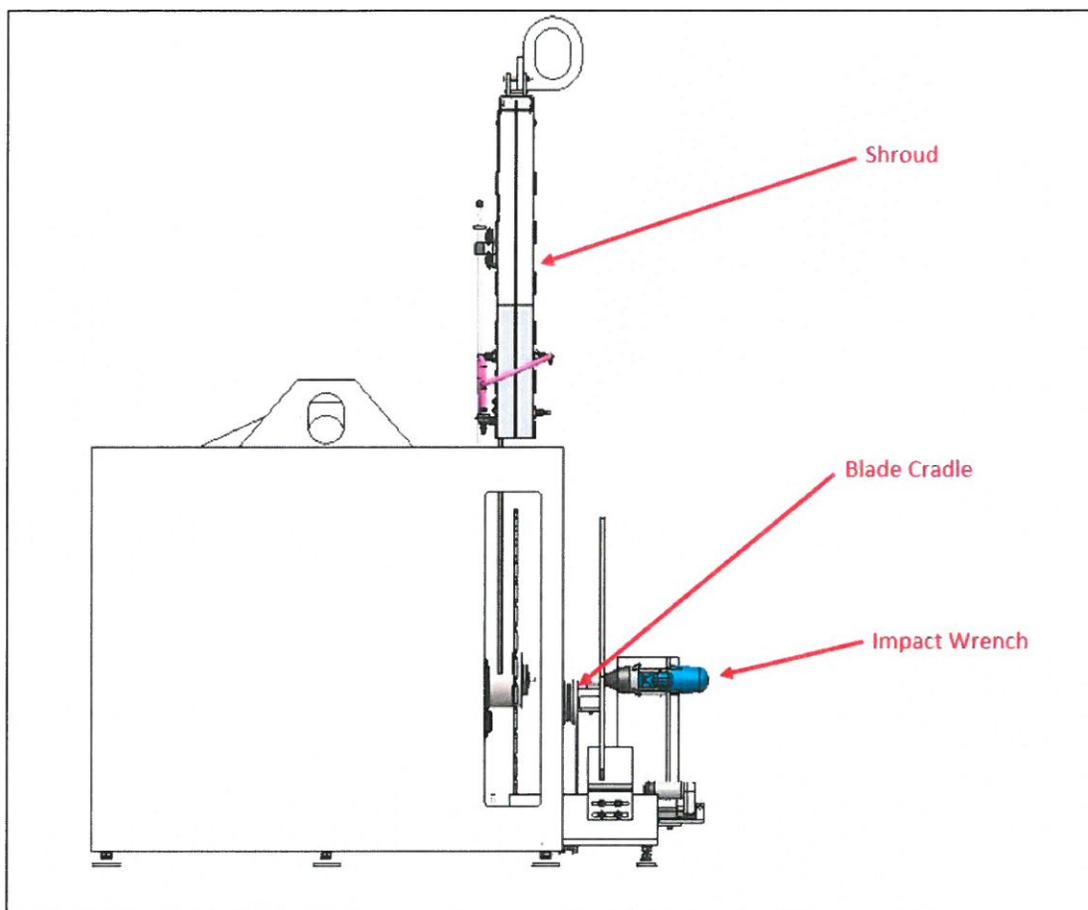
Saw with Blade Change Tool Retracted for Blade Removal
